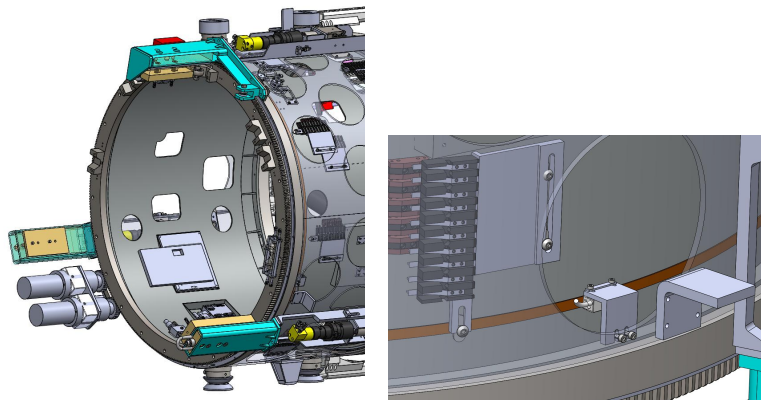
(left) Ring gear, detents (v-grooves) and detent mechanism (cyan, top). (right) Renishaw tape (brown) on the inner drum. The figure also shows the readhead in the assembly.
